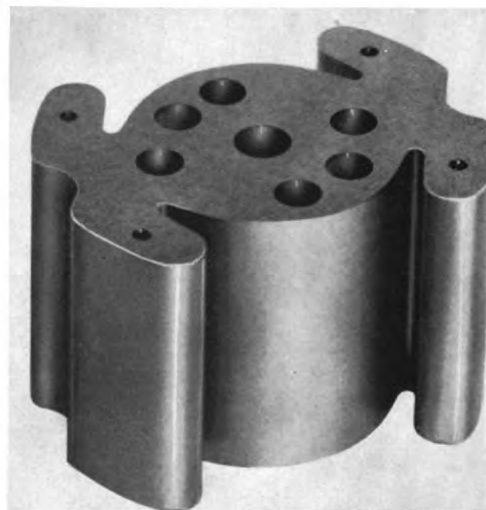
Insurance of uniform clearance results from the ability of the Jig Grinder to contour-grind punch as well as die of the stator-rotor lamination press tool.
